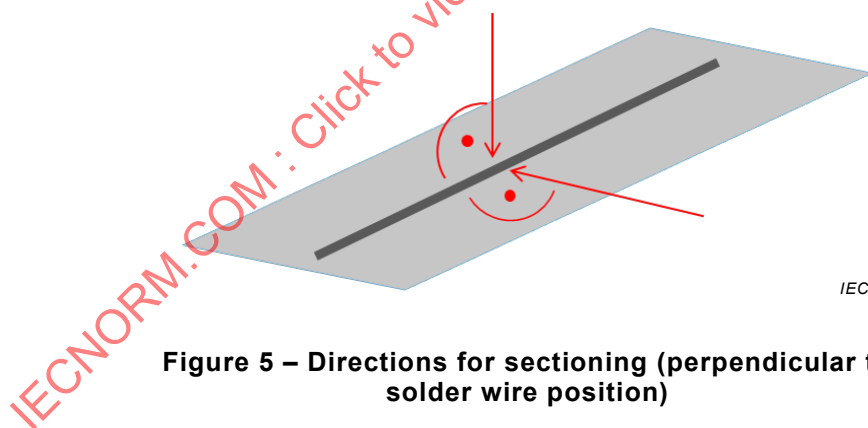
Directions for sectioning (perpendicular to solder wire position)
